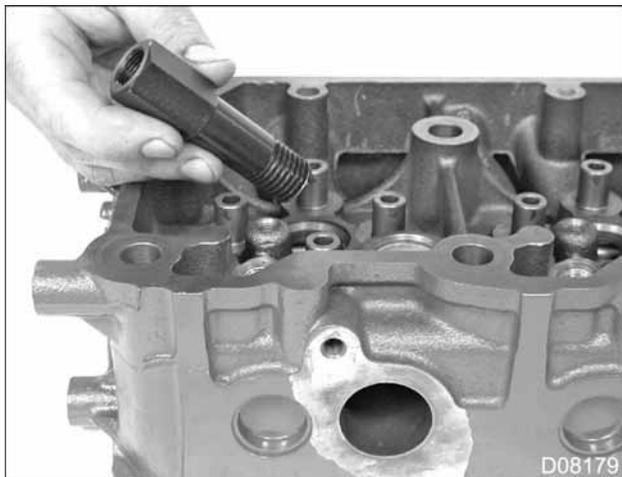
Injector Sleeve Remover (Slide hammer adapter)
